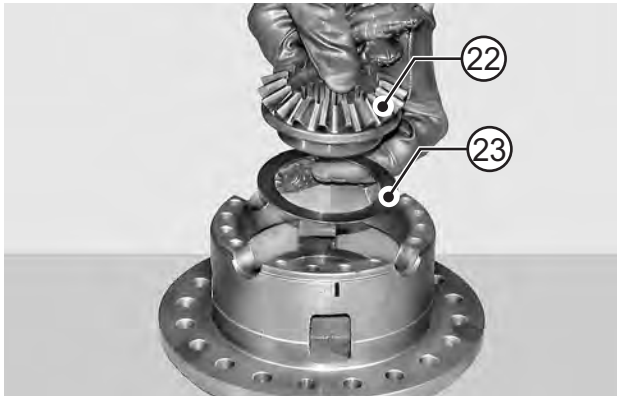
Install the shoulder shim (23) and planetary gear (22) into the half-box (7).
